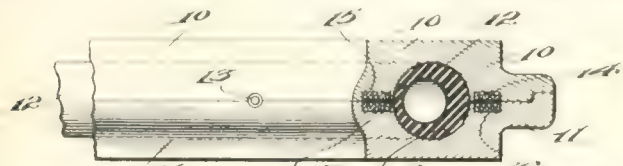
Mold for curing Single Tube Tire. Description: 10, 11, upper and lower halves of mold; 12, rubber tire; 13, valve stem; 14, 15, coils for magnetizing and heating upper half of mold; 16, 17, coils for magnetizing and heating lower half of mold.
